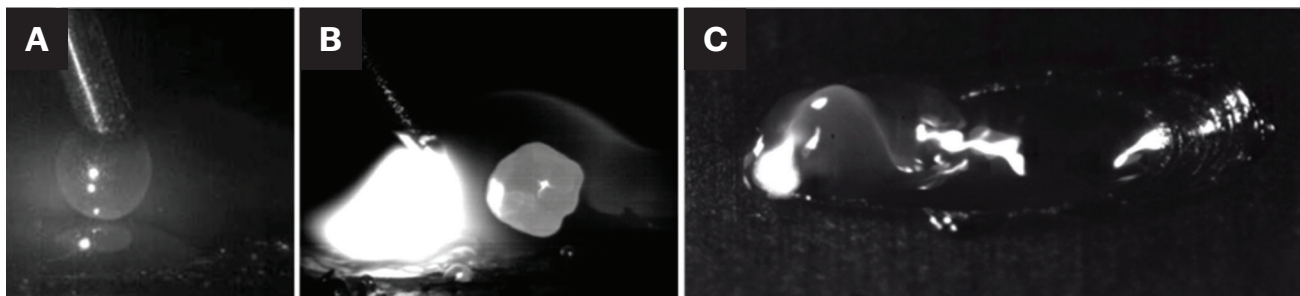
Laser frontlight images of: A — GMAW in short-circuit of steel with band pass filter (Ref. 86); B — GMAW in free-flight of steel in Ar-20%CO₂ with 808 nm laser and band pass filter (Ref. 84); C — LBW of stainless steel with a 1.5 kW laser (Ref. 87).
